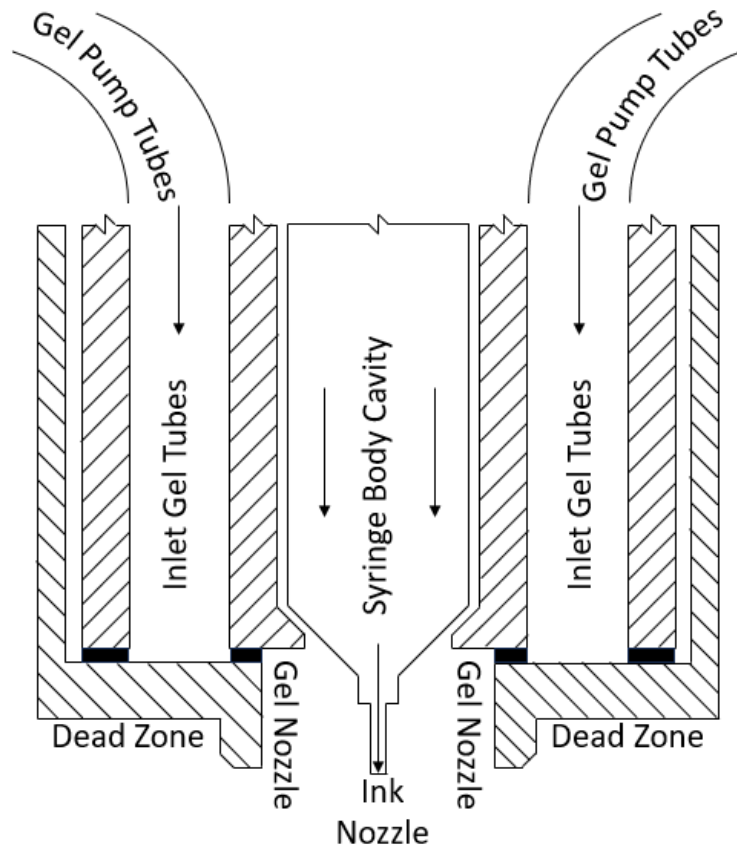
A cross-sectional view of the lower gel nozzle configuration.
